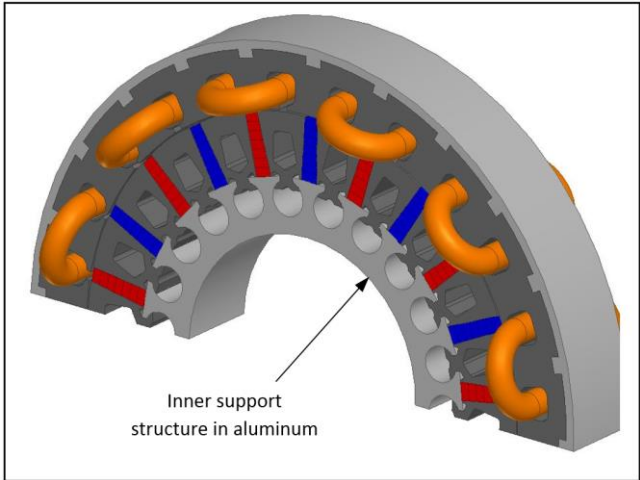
3D view of the 6-phase spoke-type PM motor (half machine)
